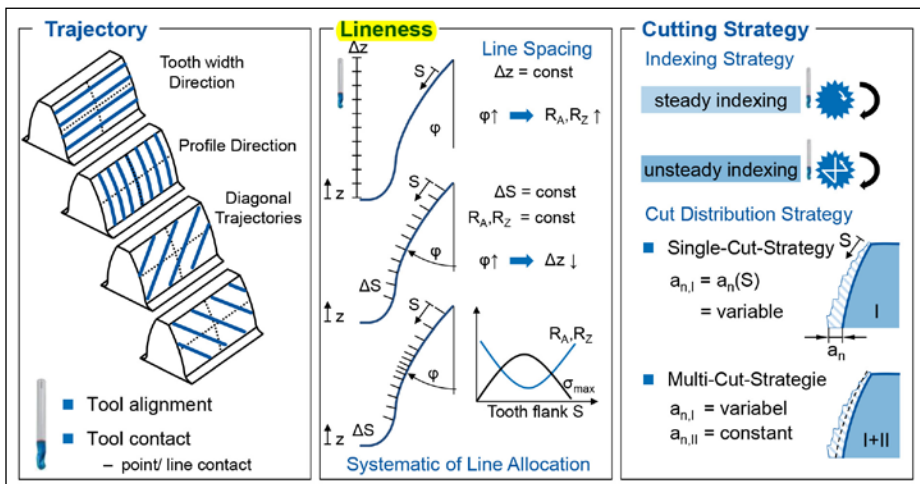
Definition of manufacturing strategy for free-form milling of gears.
